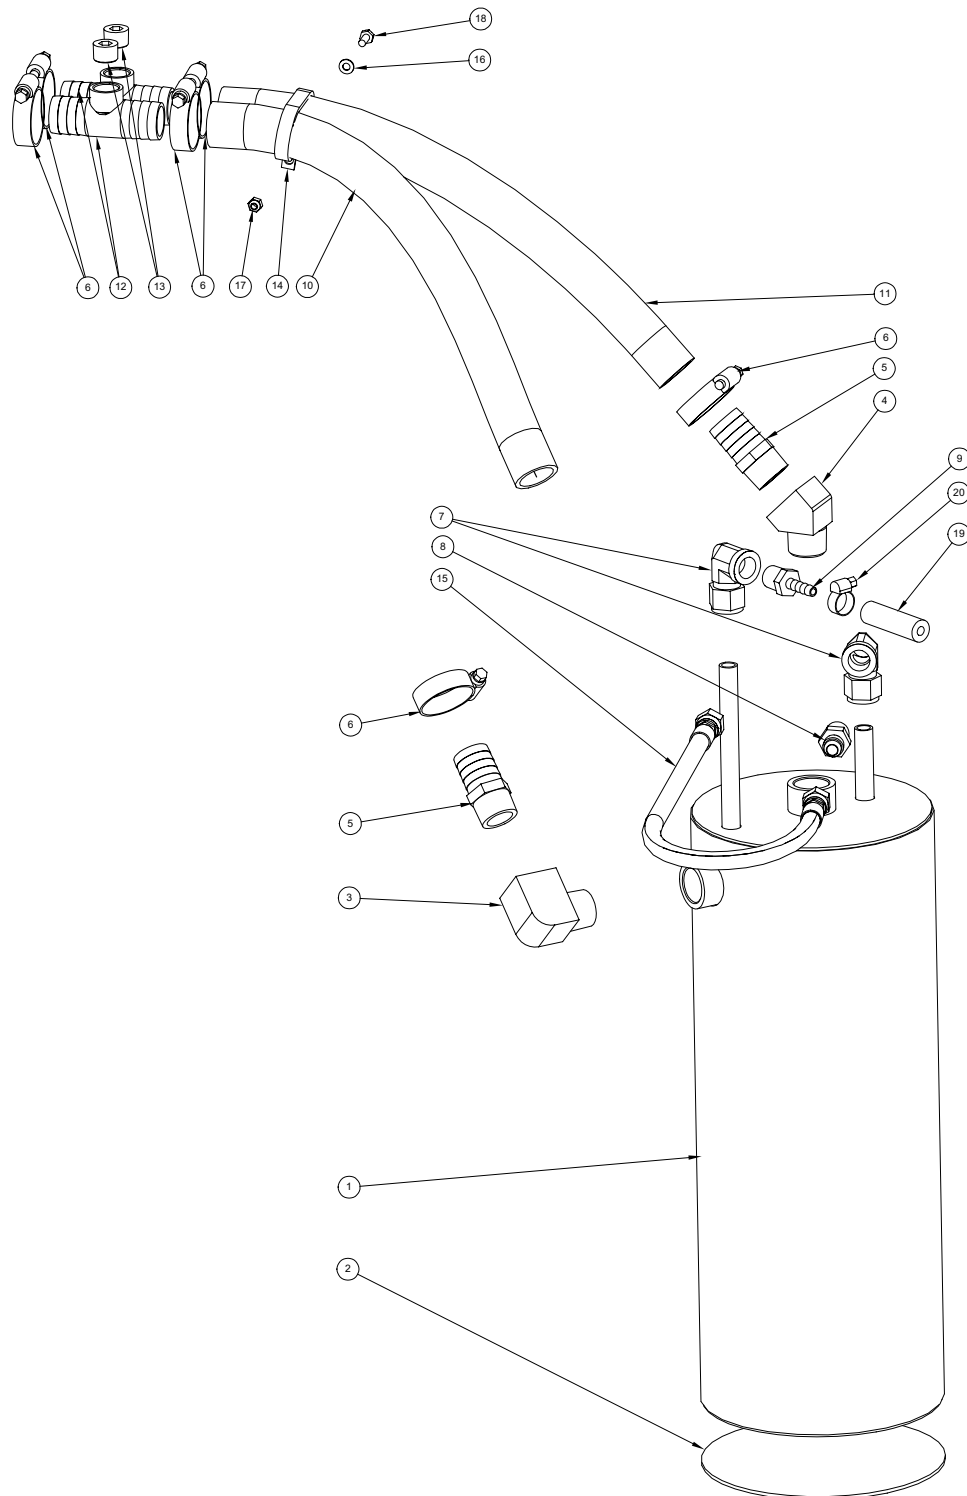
Dump & Vacuum Bracket Assembly - Rear
